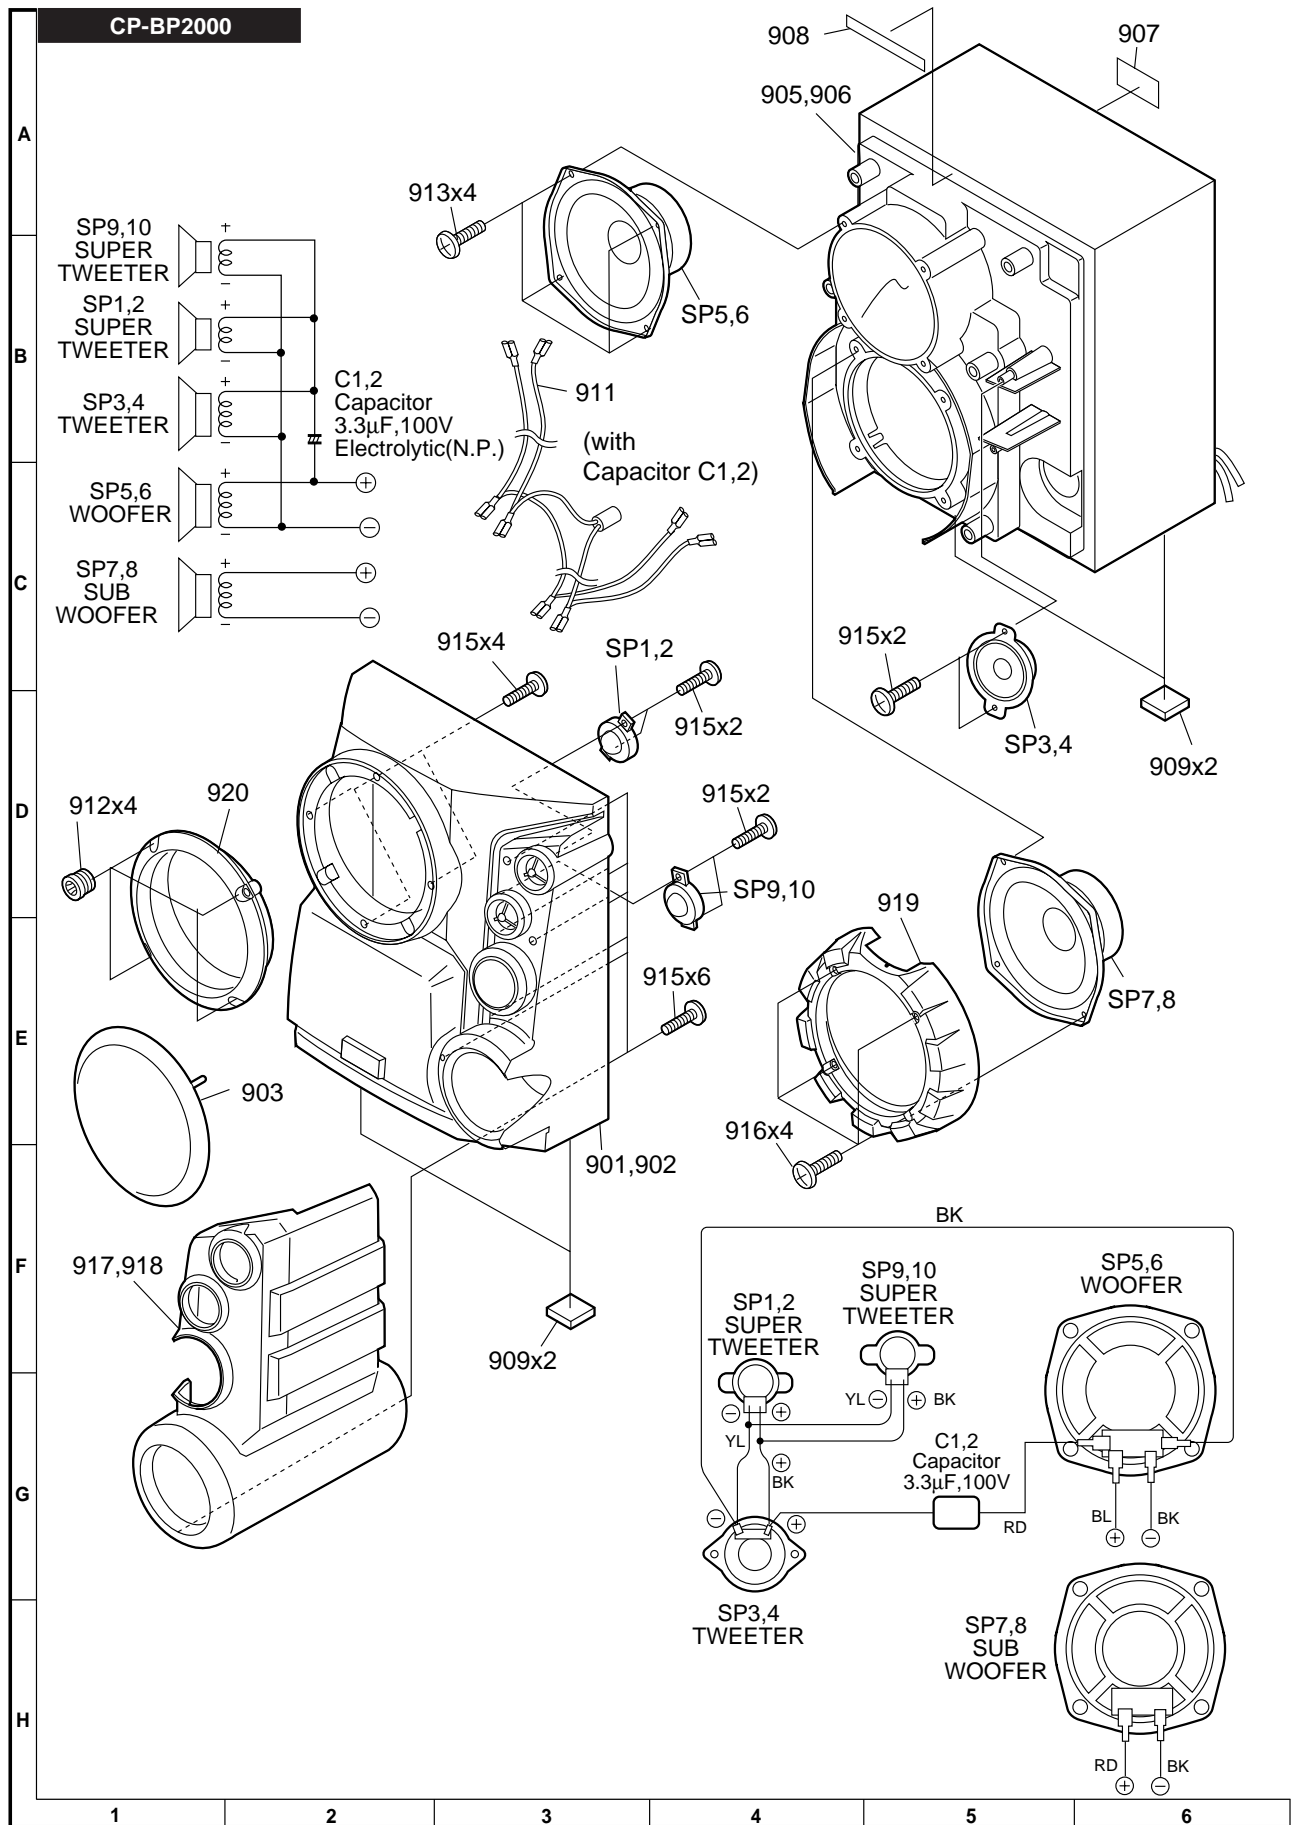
SPEAKER EXPLODED VIEW (1/3)
